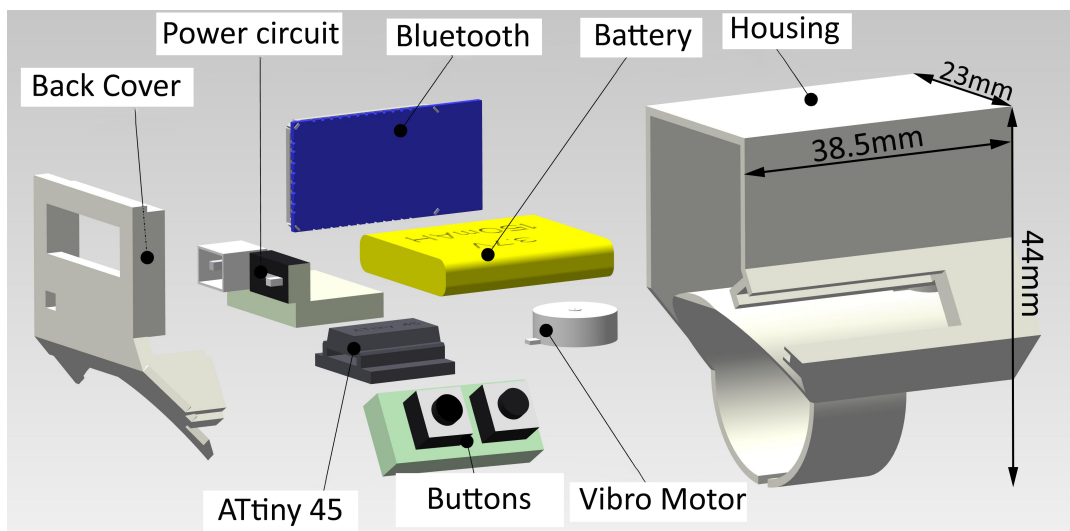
CAD exploded view of the remote ring interface for the CoGripper.
